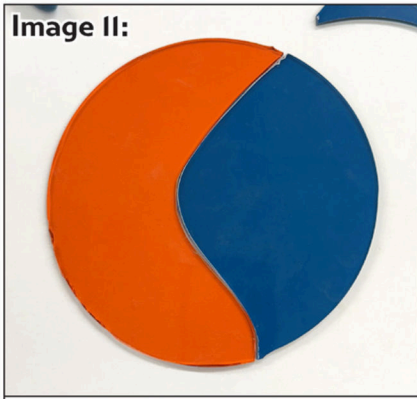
Clean the edges of all the cut pieces, and assemble the two colored halves together on top of the 6" Clear circle.
